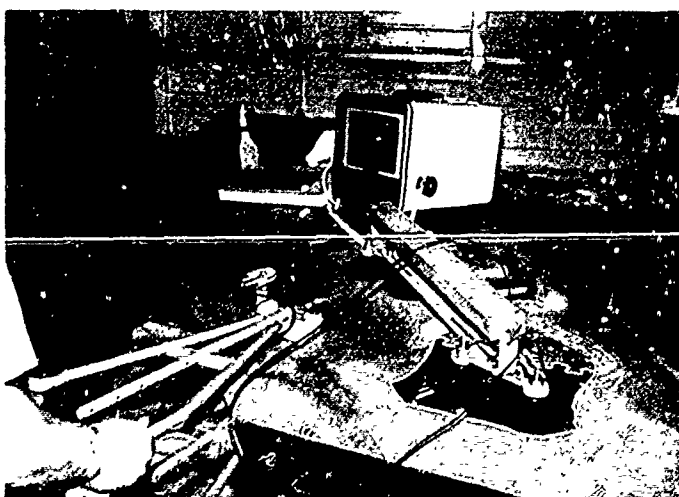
Through-transmission inspection with the probe rotated and the probe-holder block angulated.
